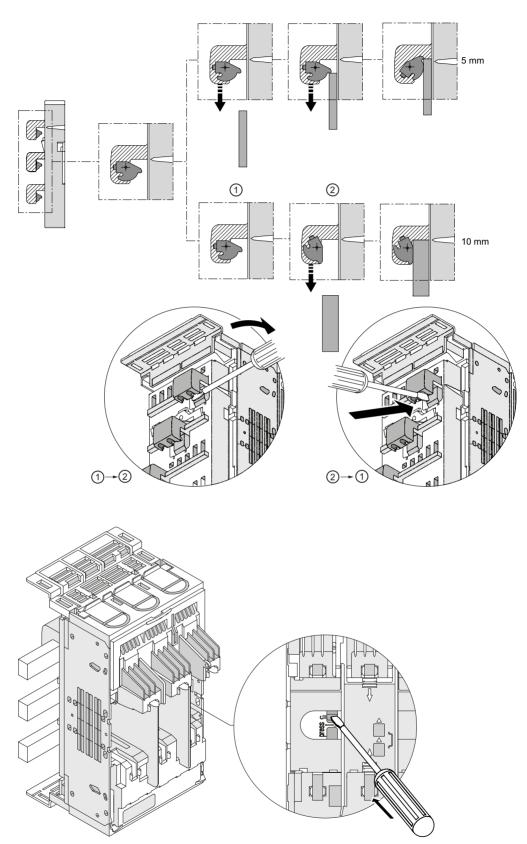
Mounting onto and dismantling from a busbar system, sizes 000 and 00
